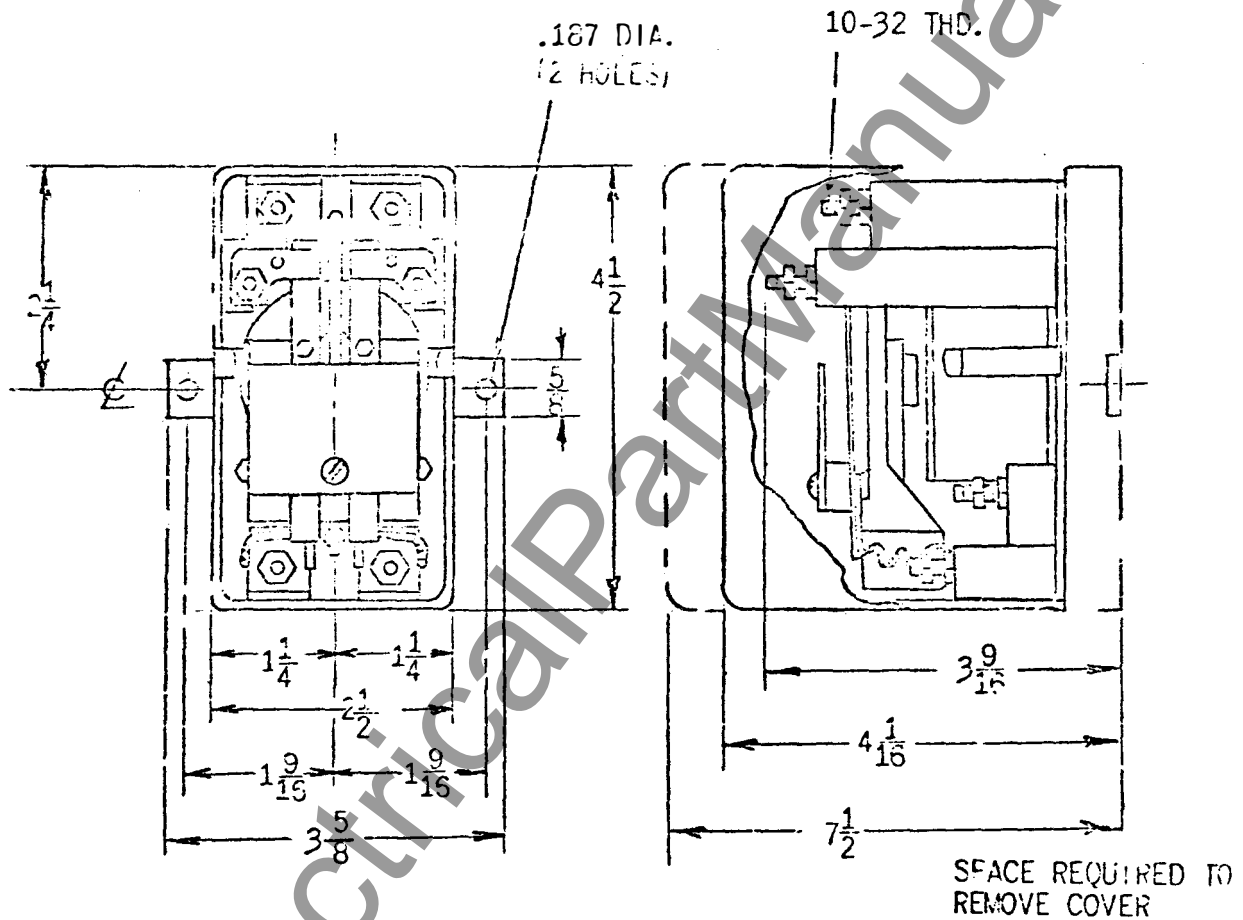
(0165A7757-002) Outline and Panel Drilling for Front Mounting of HGA17S and HGA17T Relays
